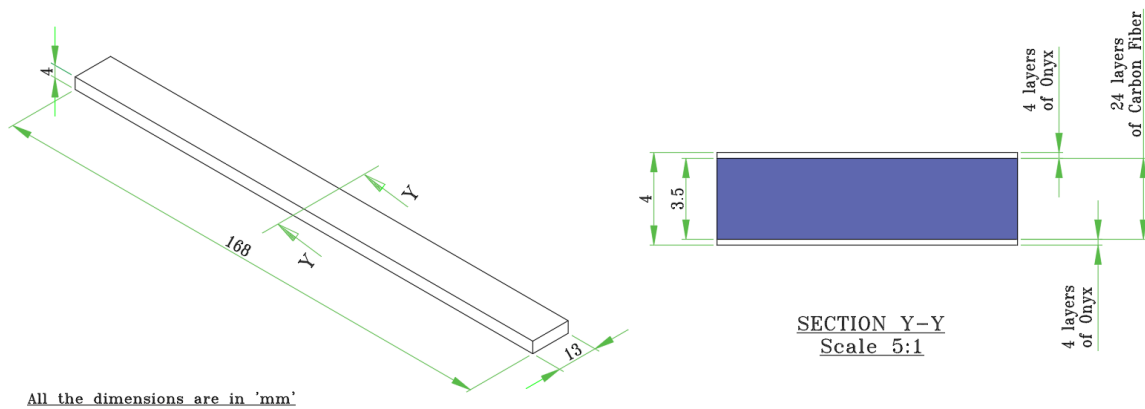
Dimensions of flexural specimen and sectional view to illustrate the fiber and matrix layers
